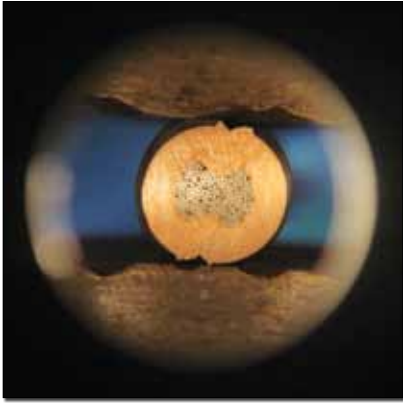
Sleeve material is cold formed into the cable until the cable and sleeve are one unified mass.
